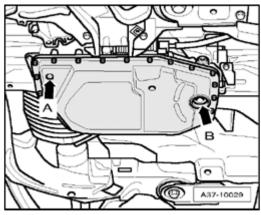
Identifying ATF Inspection Plug Courtesy of VOLKSWAGEN UNITED STATES, INC.
